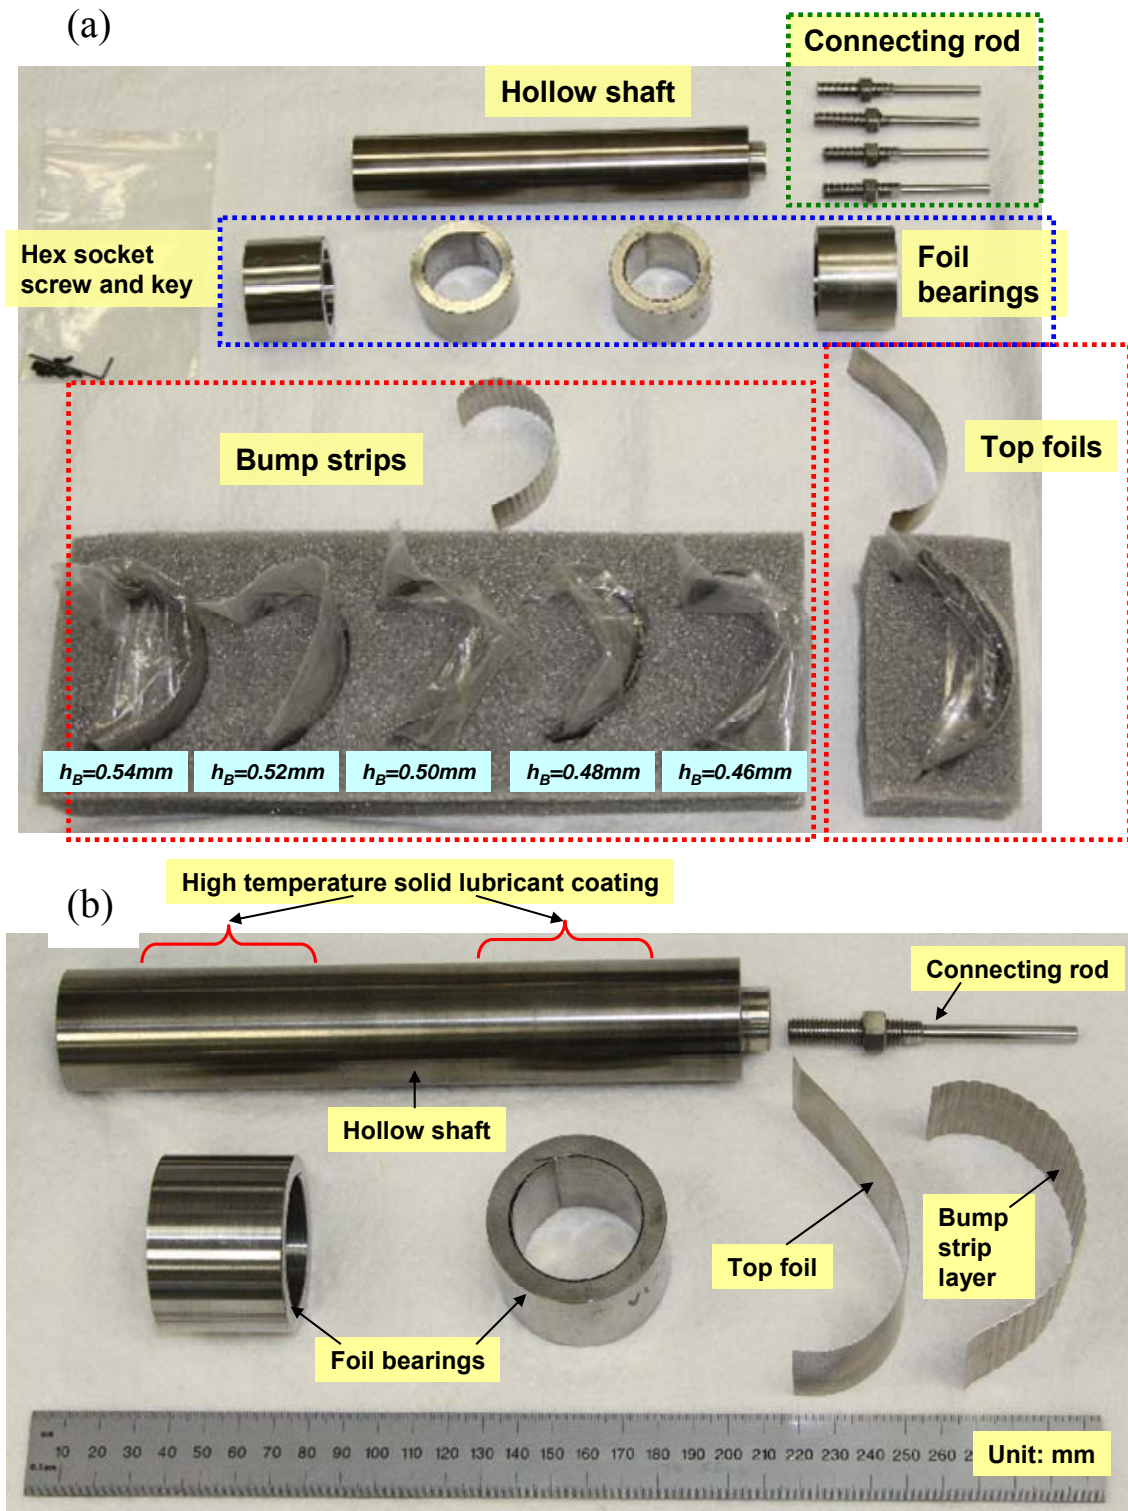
Photographs of donated KIST high temperature rotor, foil bearings, top foils and bump strip layers.
